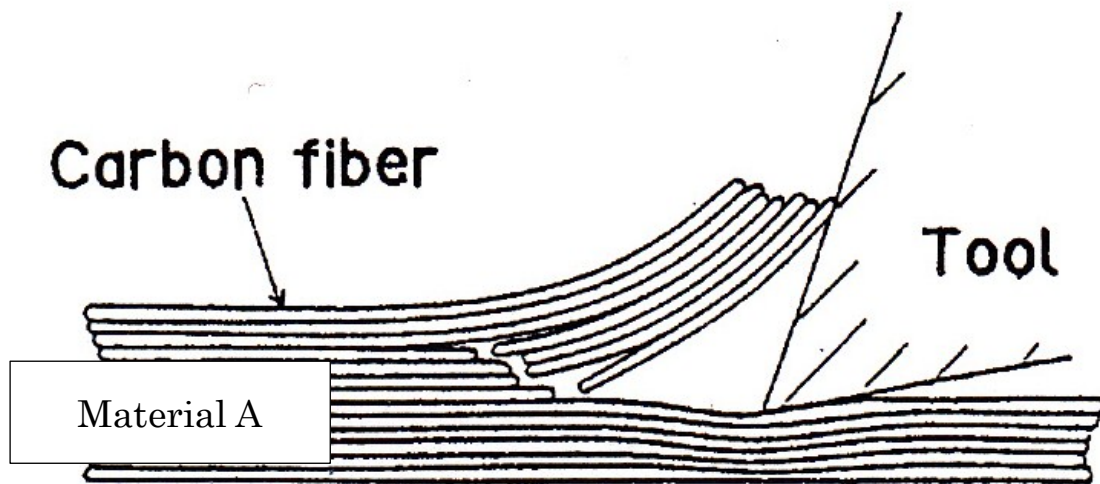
State of during machining with the Material A ( $0^\circ$ ) (Up cut method) <sup>8)</sup>
